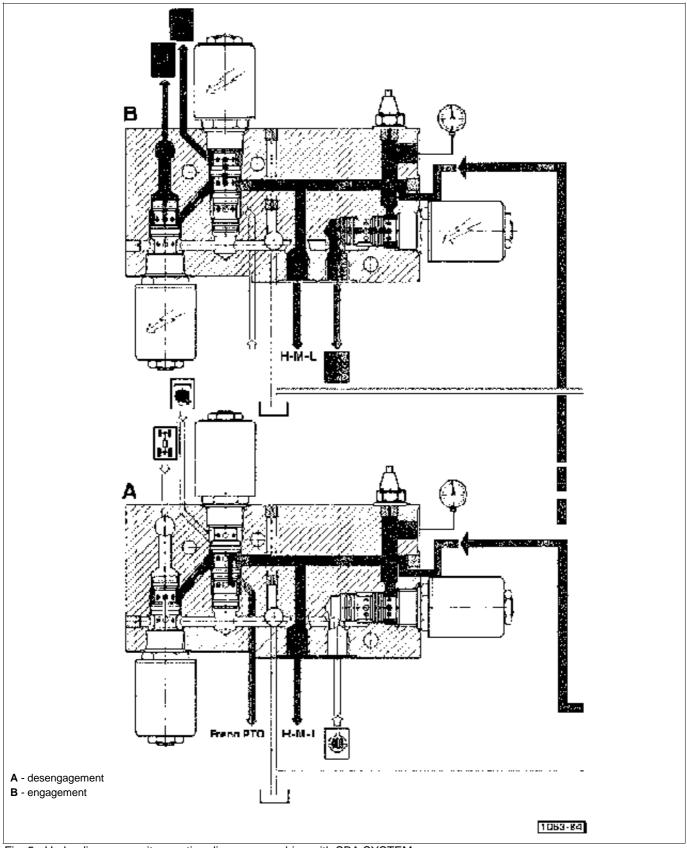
Hydraulic power unit operating diagram - machine with SBA SYSTEM.
